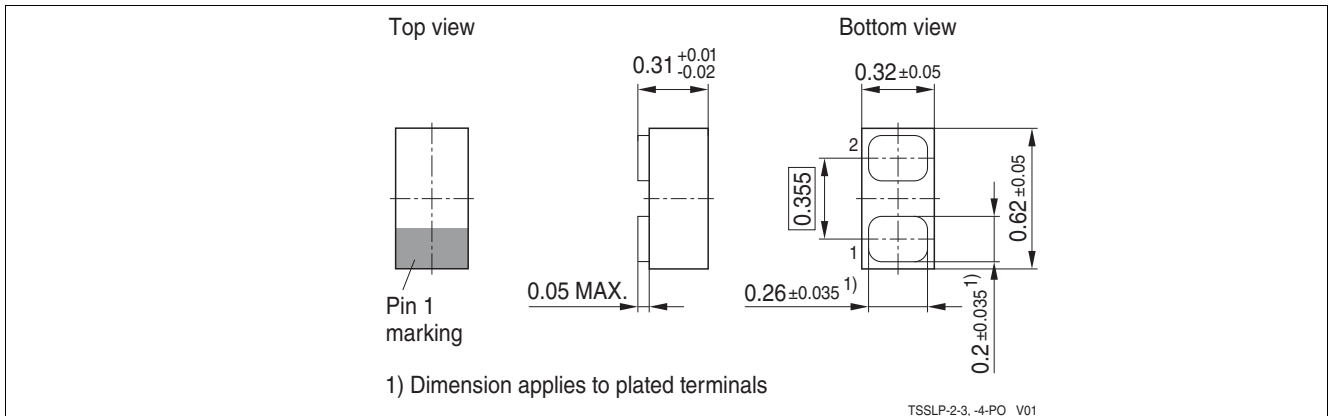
TSSLP-2-4 Package outline (dimension in mm)
